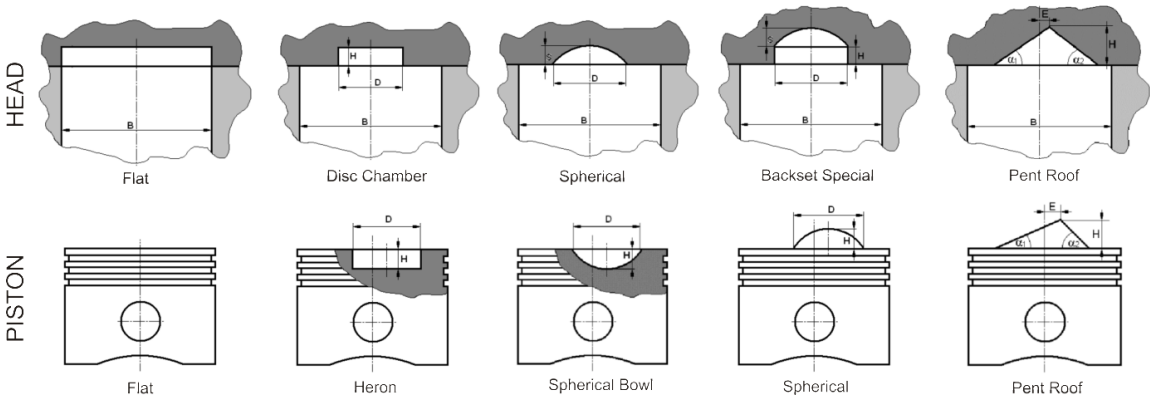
Simplified geometries of the cylinder head and piston designs that can be calculated directly by AVL BOOST [86].
